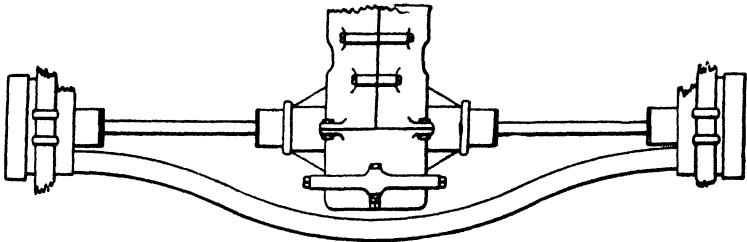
DE DION-TYPE DRIVING AXLE.
